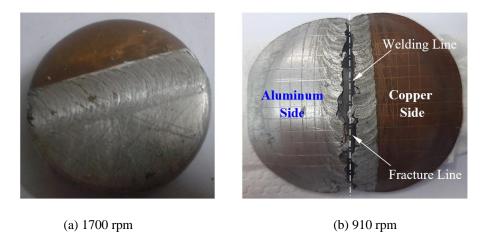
Images of the Al-Cu joint after the cup test, and that in case of welding at rotational speeds of (a) 1700 rpm and (b) 910 rpm. The traverse speed is equal to 16 mm/min. The copper has been annealed.
